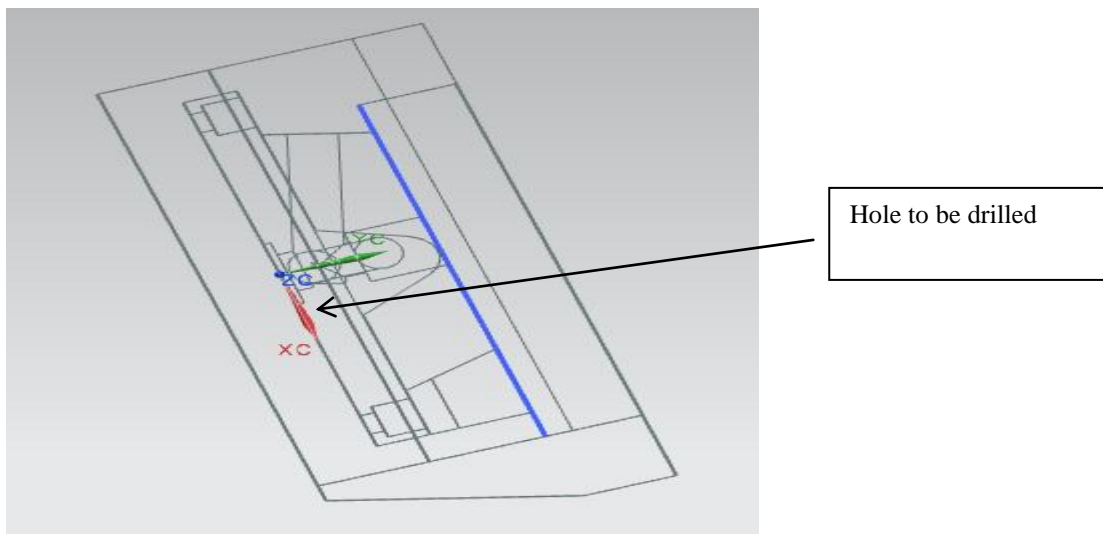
shows the mount base area of jig for drilling second angled hole.
